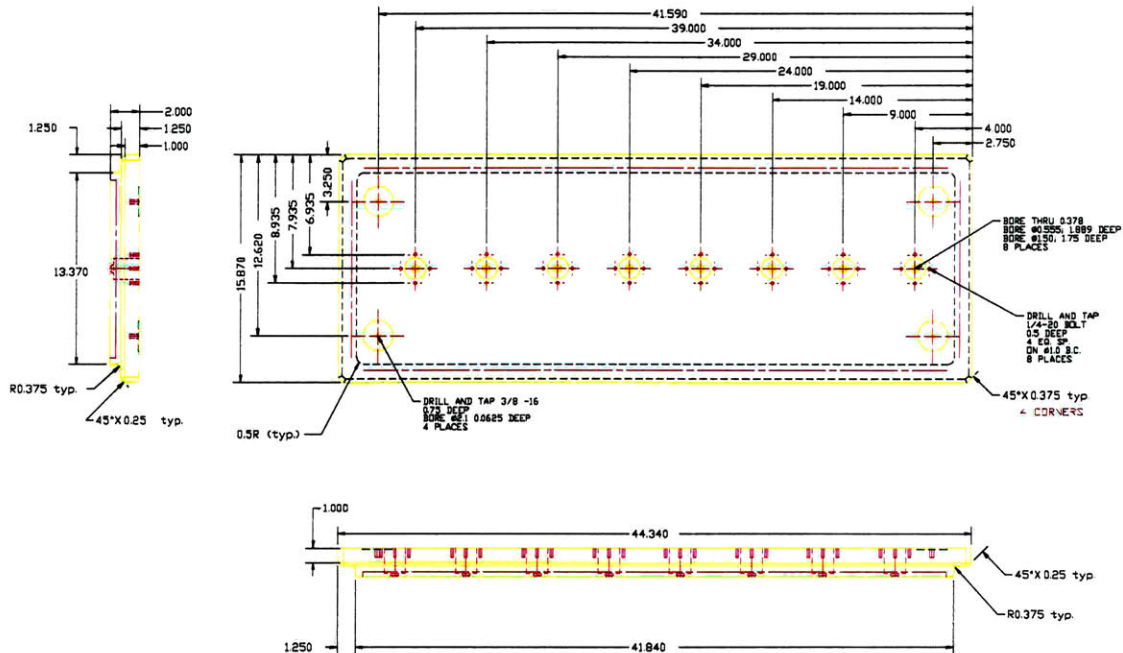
Machine Drawing for the mechanism base plate; top and side views. The master is a copy of the existing window design modified such that the eight bearing housings can be mounted and the top plate can be stabilized.
